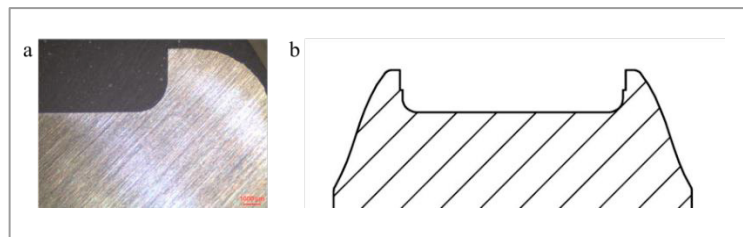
Geometry of QT and nitrided steel crankshaft journal; (a) real pin section, (b) longitudinal section view of a pin.
